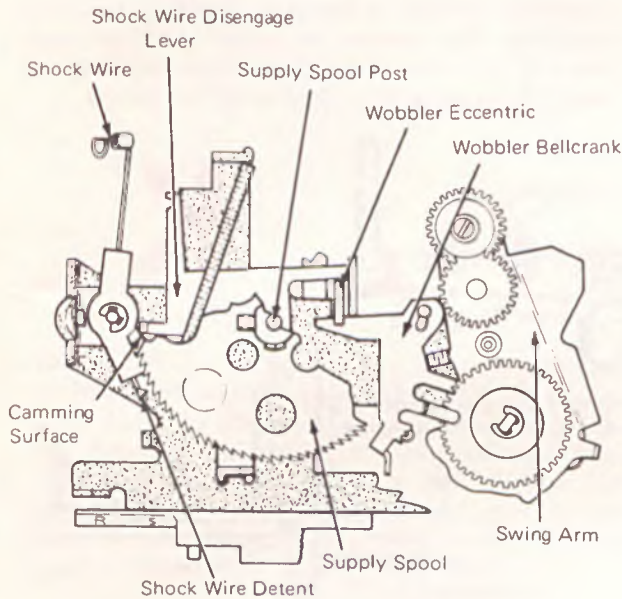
Load Operation – Wobbler Release – Shock Wire Disengage (Top View)
